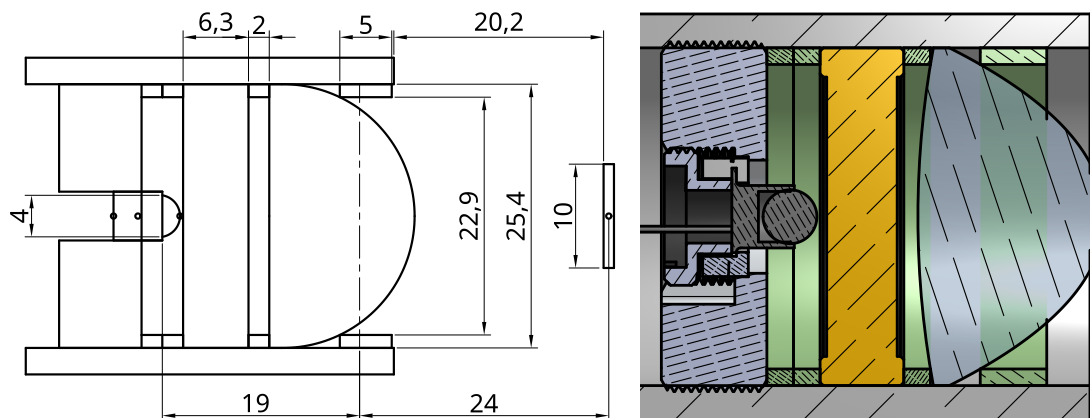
Mechanical drawing (Left) and 3D section-view (right) of the final illuminating block assembly. From left to right (all parts are Thorlabs'): an LED mount (S1LEDM) holding the LED (LED450L), two retaining ring (SM1RR), the excitation shortpass filter (FES450), a third retaining ring (SM1RR), the lens (ACL25416U), and a large retaining ring (SM1RRC). All elements are mounted into a SM1 threaded tube. The rectangle element on the right part of the mechanical drawing depicts the thin film. Note that the focal plane of the lens is plotted as a dashed line.
